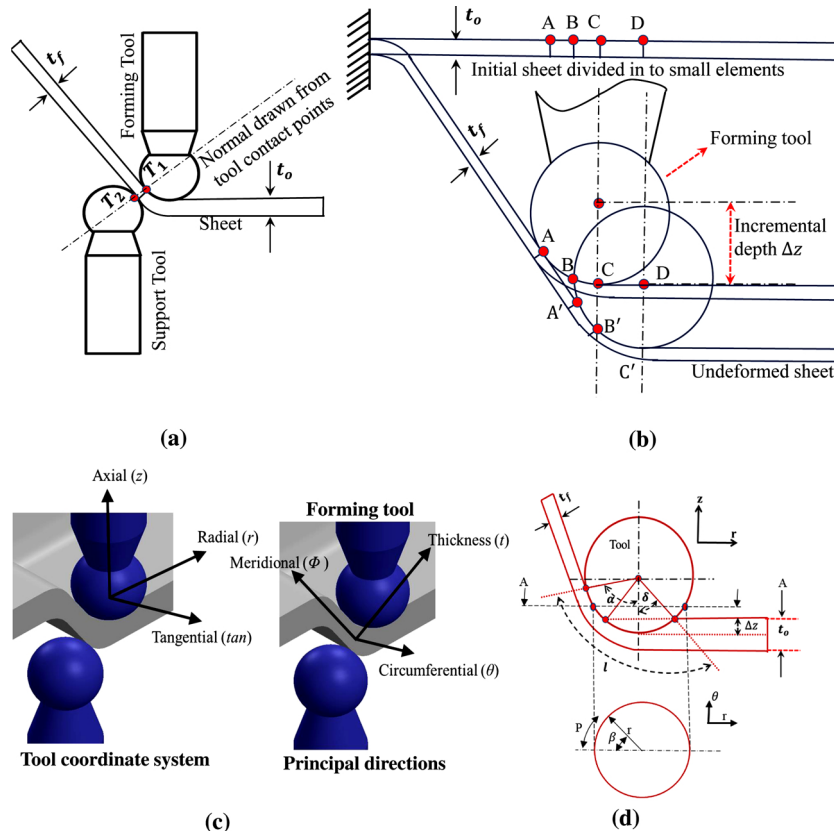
(a) Tool configuration, (b) schematic showing the material movement to predict deformed sheet thickness [39], (c) tool coordinate system and principal directions, and (d) schematic showing the tool-sheet contact area calculation [40].
